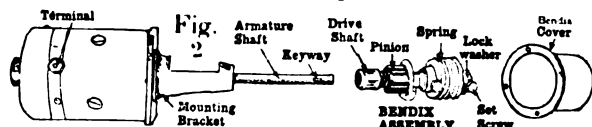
Starting motor with Bendix drive parts removed from armature shaft.
